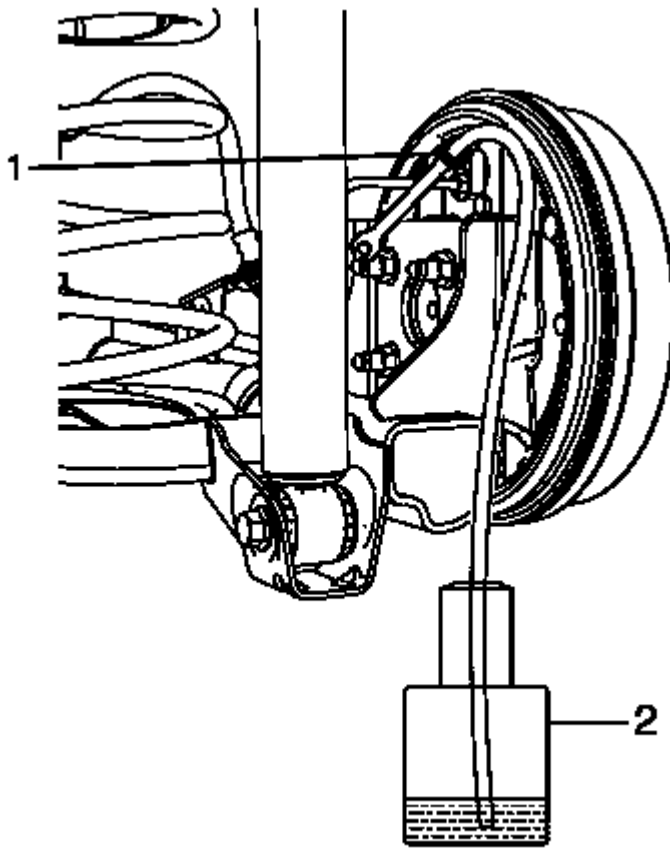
Wheel Hydraulic Circuit Bleeder Valve & Draining Container
